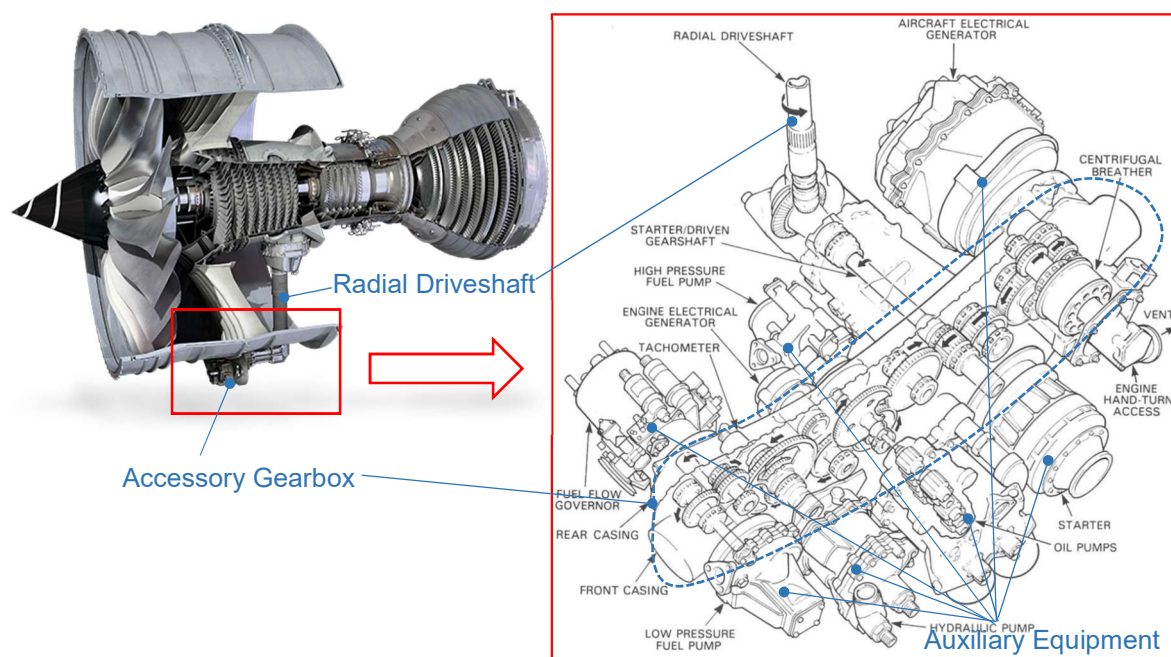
Drivetrain from engine to auxiliary equipment (1-14)
